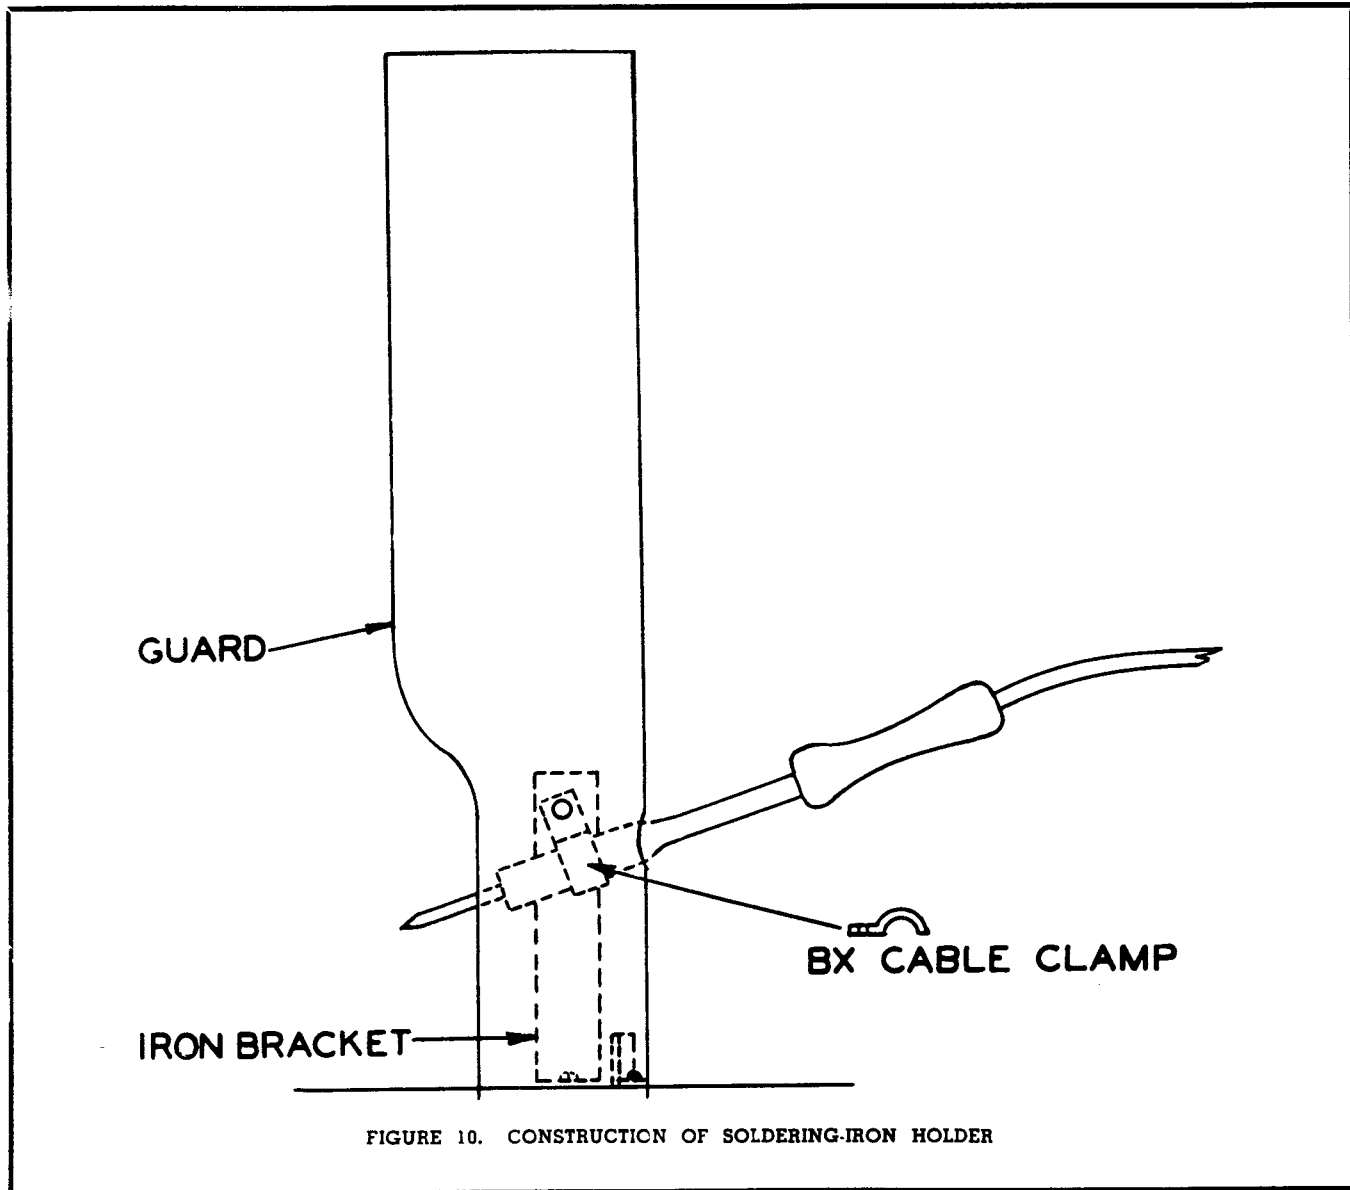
CONSTRUCTION OF SOLDERING-IRON HOLDER
